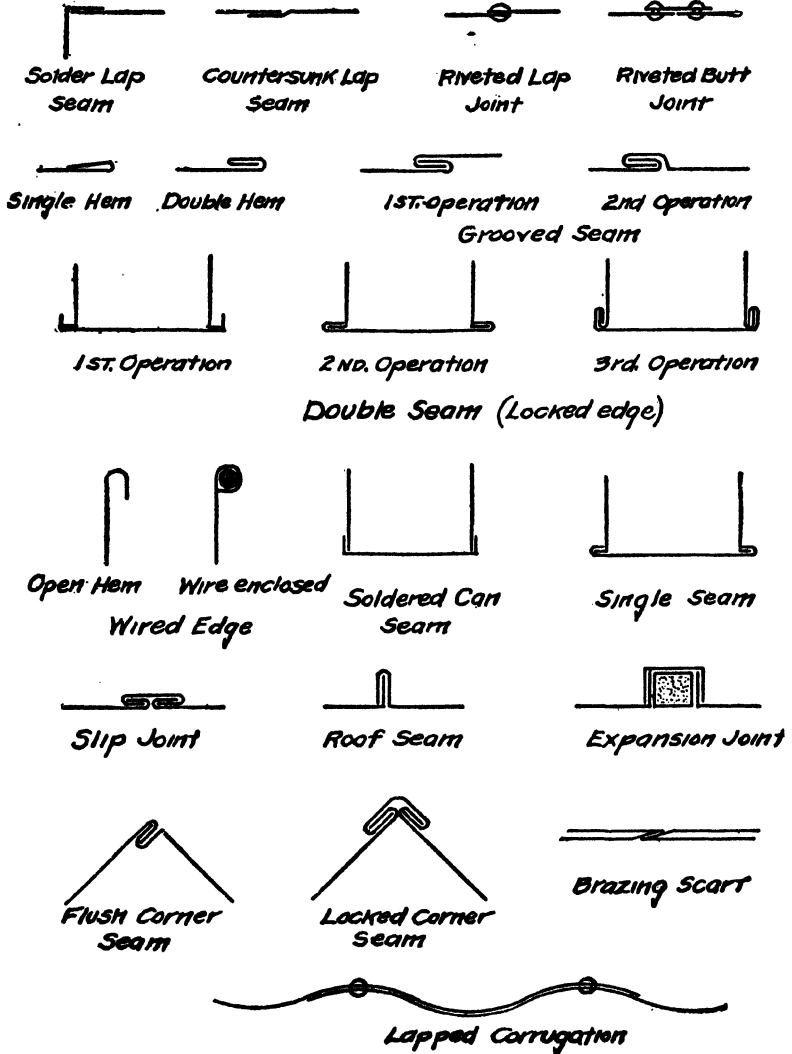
Types of Joints and Edges for Sheet Metal.
